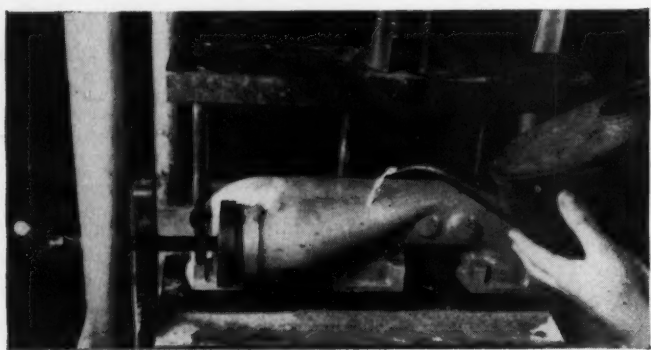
Warm soap solution poured over outside of casting reveals leaks as small bubbles when air pressure is applied internally.
